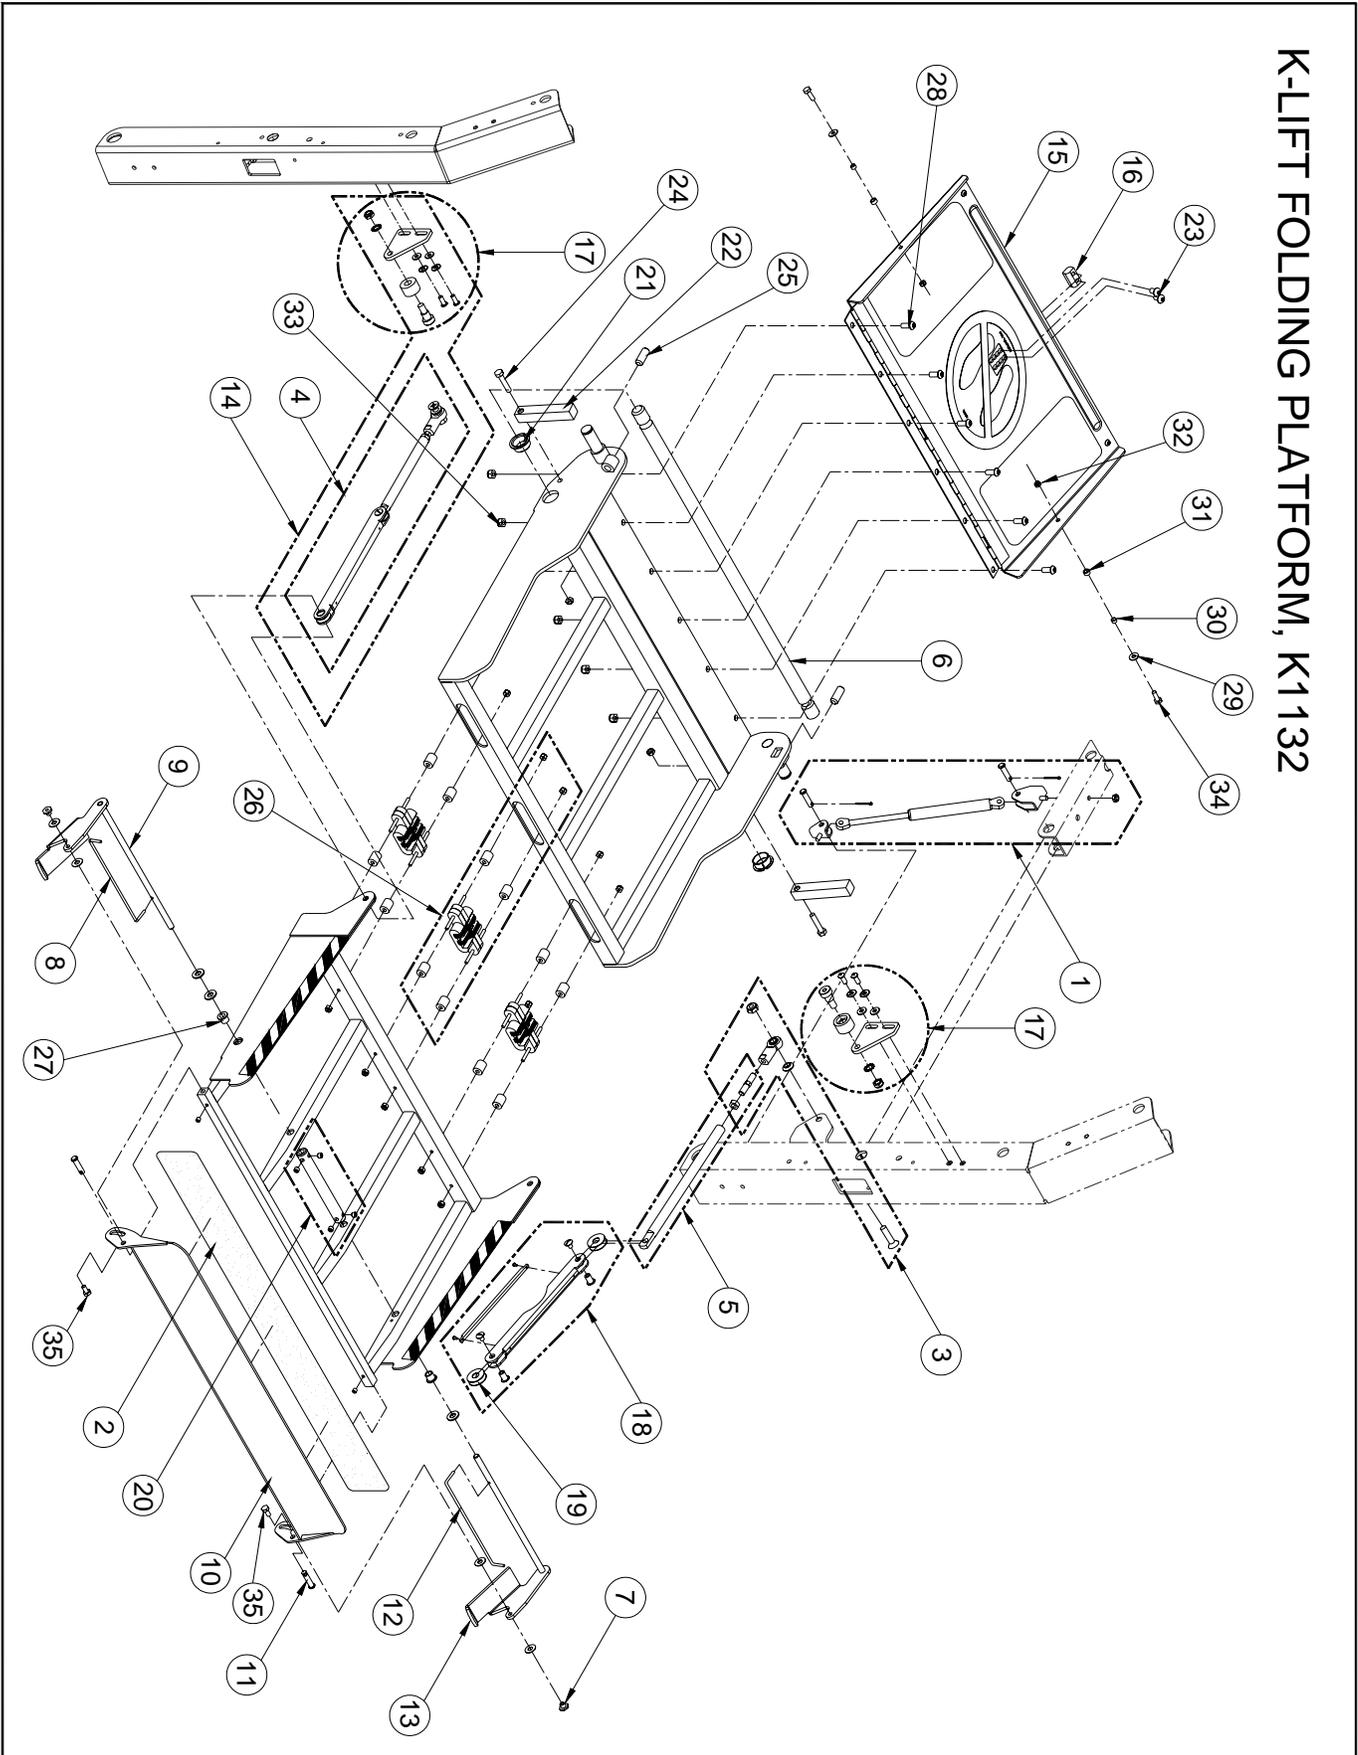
FOLDING PLATFORM ASSEMBLY, K1132
